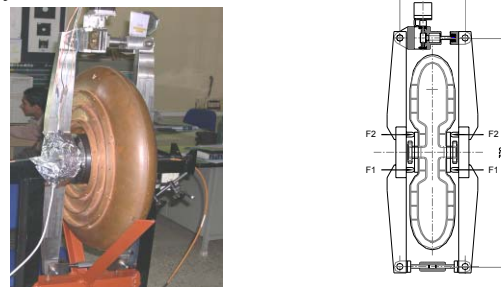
cavity with tuners on measurement bench (left) Tuner Assembly (right).
